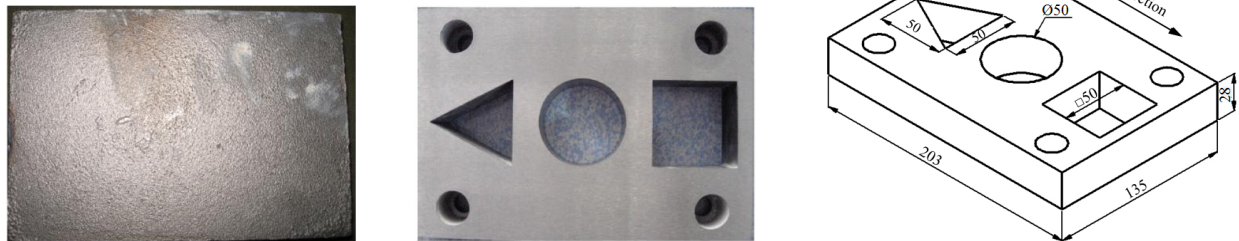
The cast sample, machined surface, dimensions of the specimen used in the experiment (dimensions in mm)
